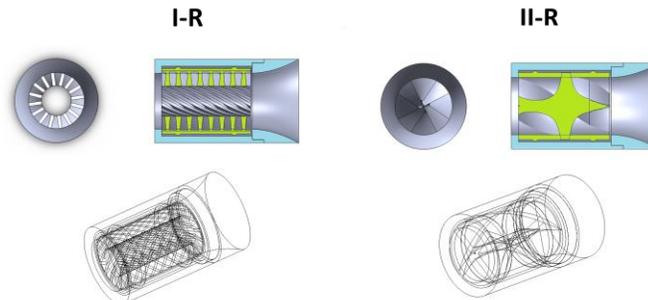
Rotary turbine-like nozzles designs for screw compressor installation: I-R – rotating nozzle with perimeter blades, II-R – rotating nozzle with two intersecting twisted blades.
